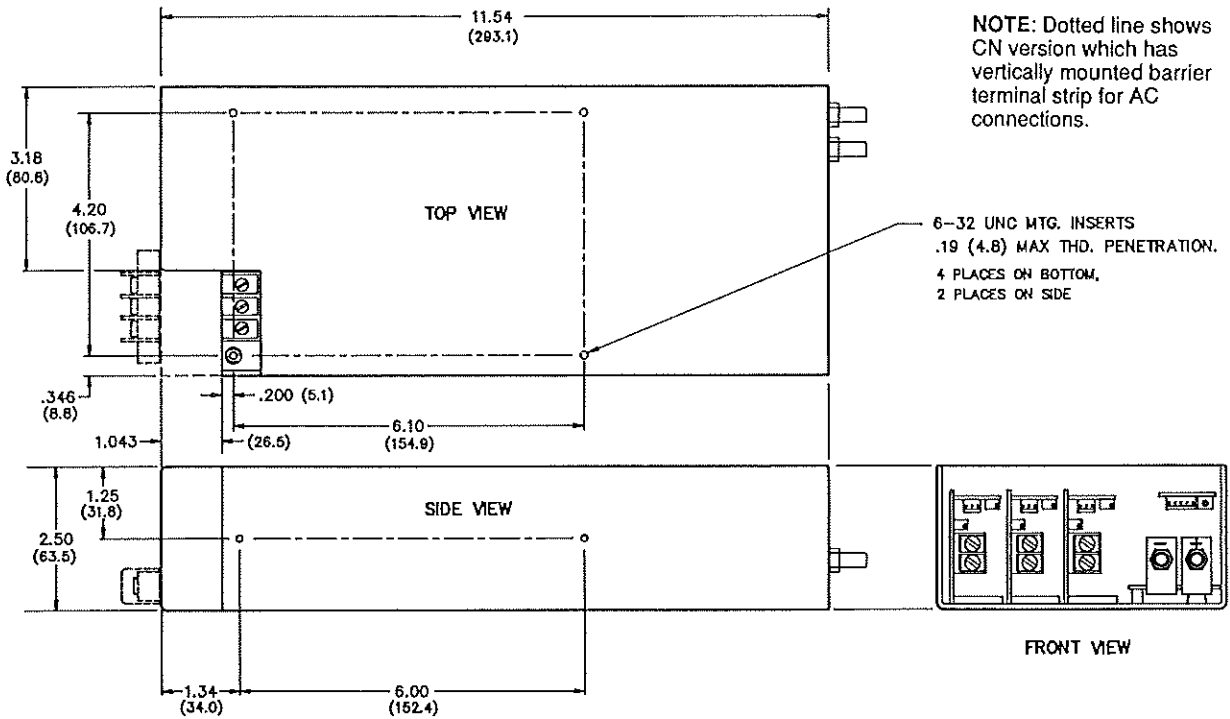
Case Drawing: Standard Version, Open Frame
